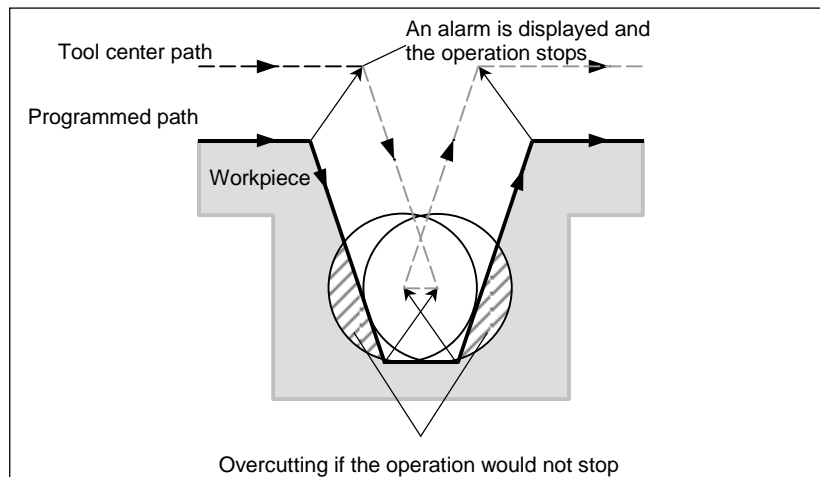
(a) Machining a groove smaller than the diameter of the tool
